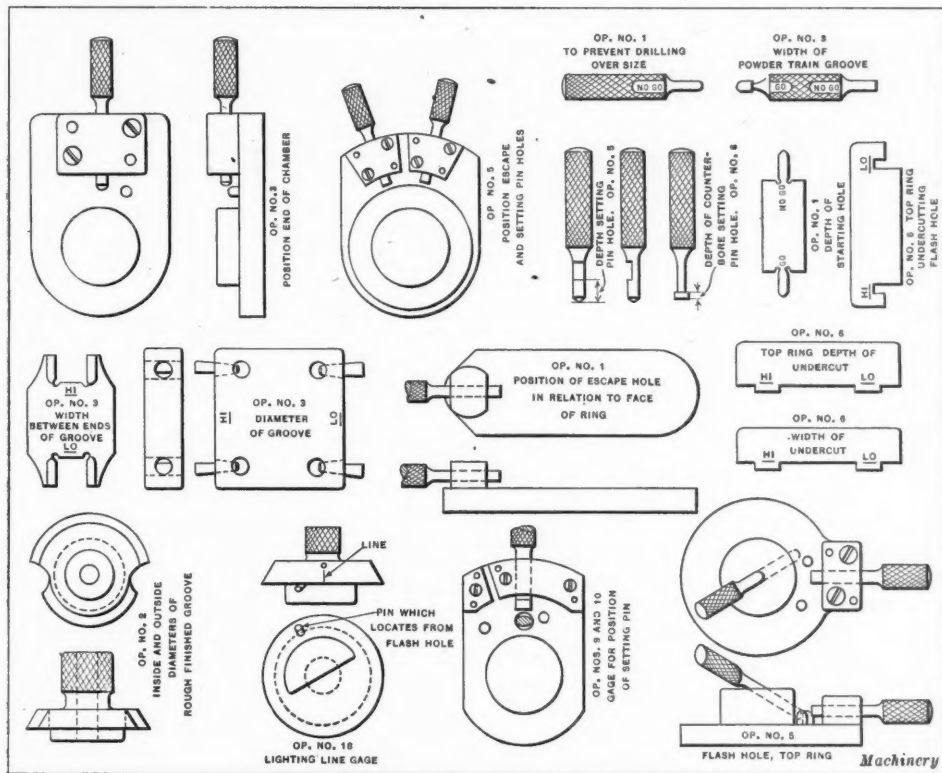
Miscellaneous Examples of Gages used in testing Fuse Parts
